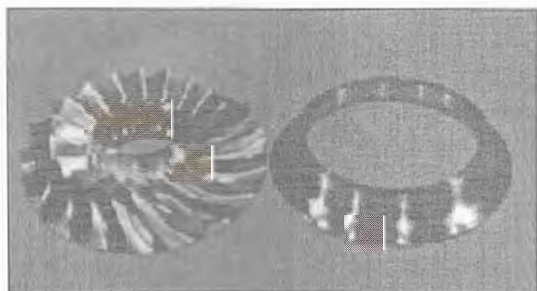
A typical two-piece impeller consisting of an integral machined bladed disc and separate cover
